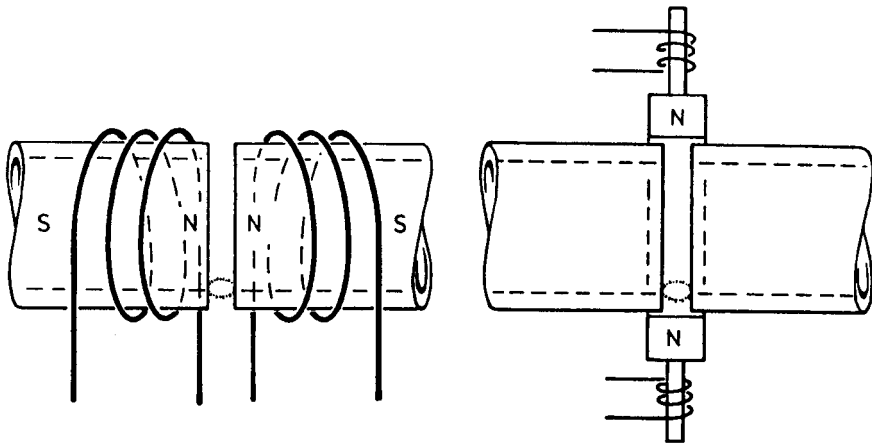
Schematic of the operation of the magnetically impelled arc butt (MIAB) welding process. (From “Magnetically Impelled Arc Butt Welding: Development and Applications” by P. Hone, in *Proceedings of Sheet Metal Welding Conference III*, organized and sponsored by the Detroit Section of the American Welding Society, 25–27 October 1988, and used with permission.)
